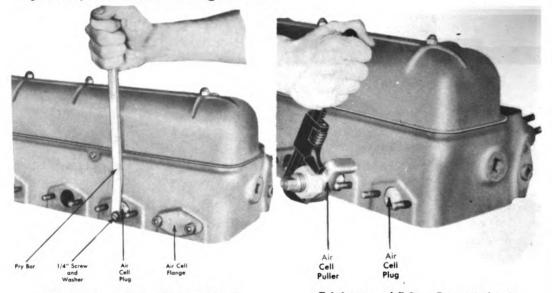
Removing Air Cell Plug. Figure 156. Removing Inner Cell with Puller.
